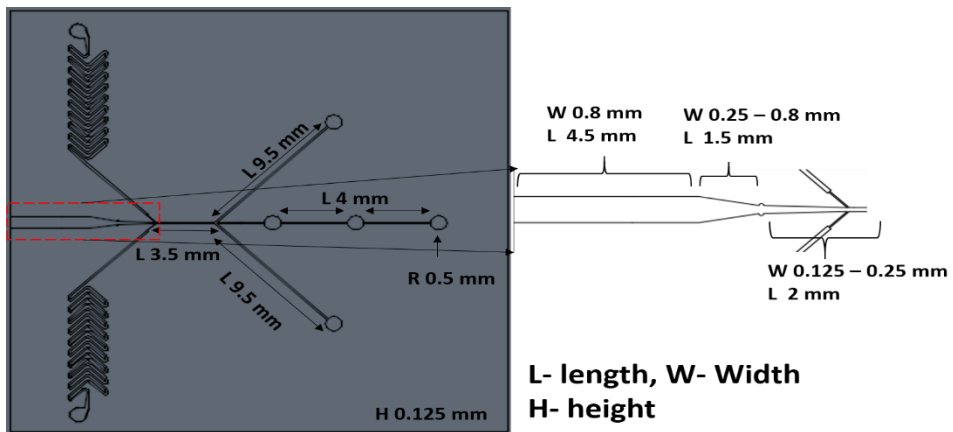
The dimensions and AutoCAD drawing of the chip are shown along with the dimensions of the waveguide for fiber integration.
